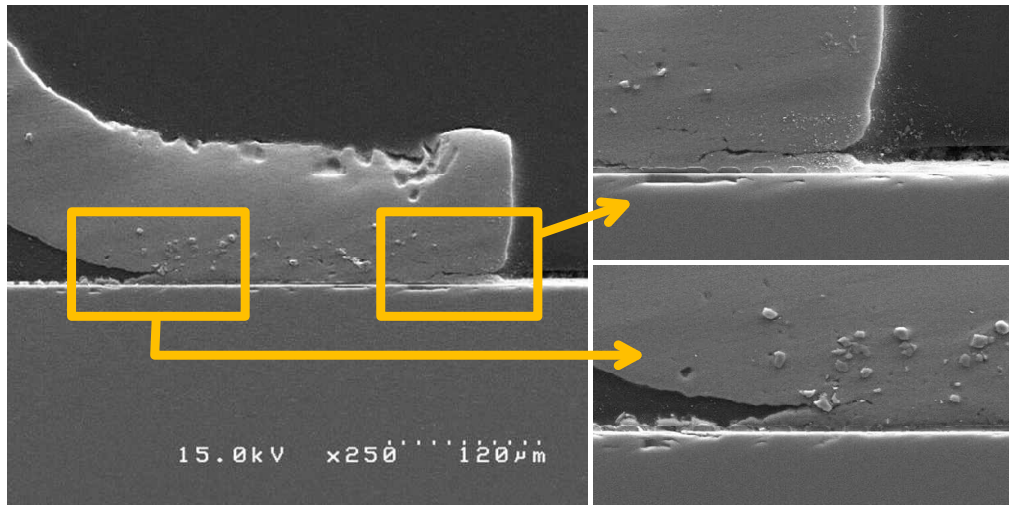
A cross-sectioned bond wire connection showing a propagating crack. The image is adapted from [78].
